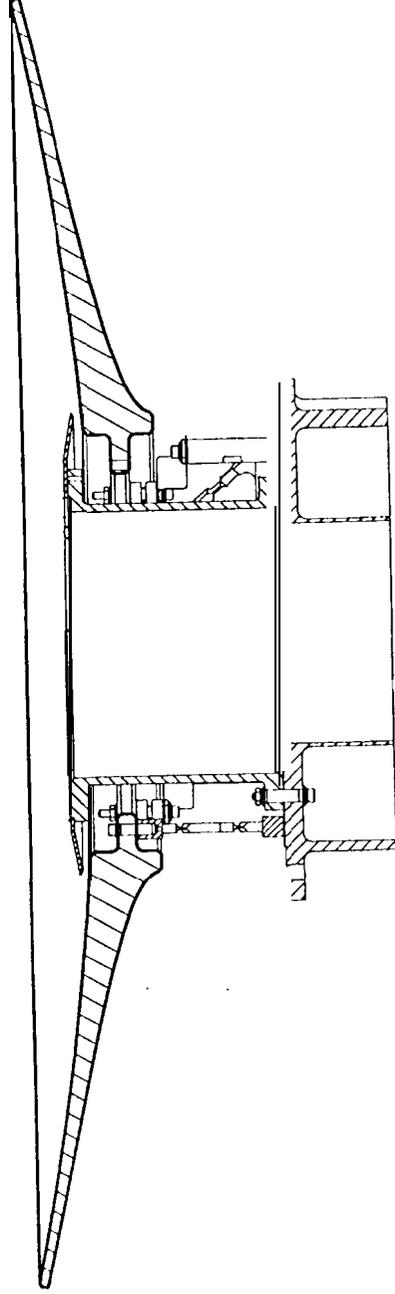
Cross-sectional drawing of the ITTT primary mirror assembly showing bulkhead, adapter tube, primary mirror and ID aperture stop with bipod flexures and connecting hardware.
